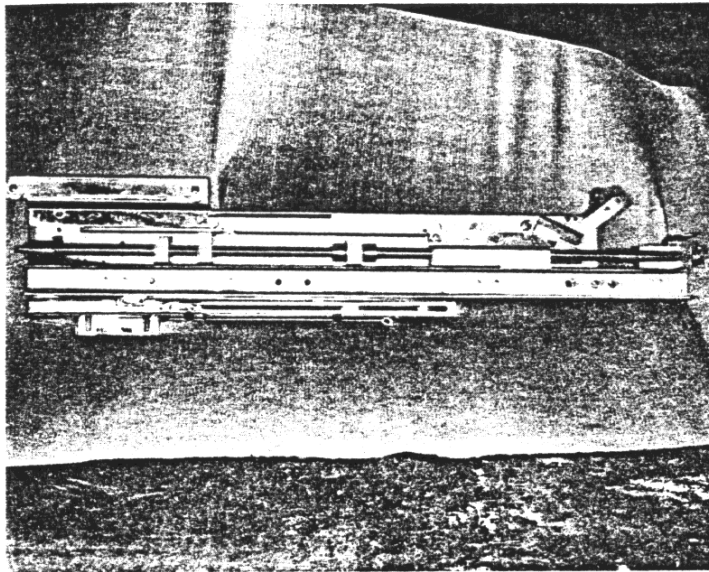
Left Hand Track Assembly for Vacuum Metal Clad
